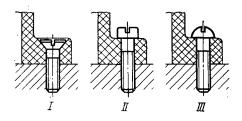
Improper (I) and proper (II, III) types of screws for fastening moulded parts
